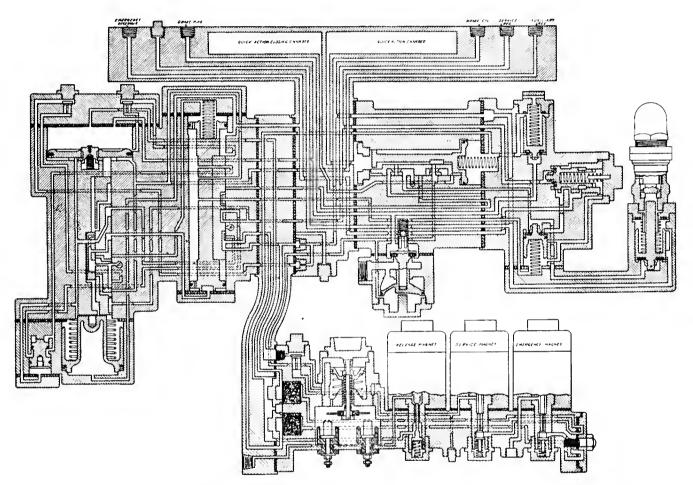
Diagrammatic View of the Universal Value, UC Equipment, showing Sequence of Parts and Passageways
